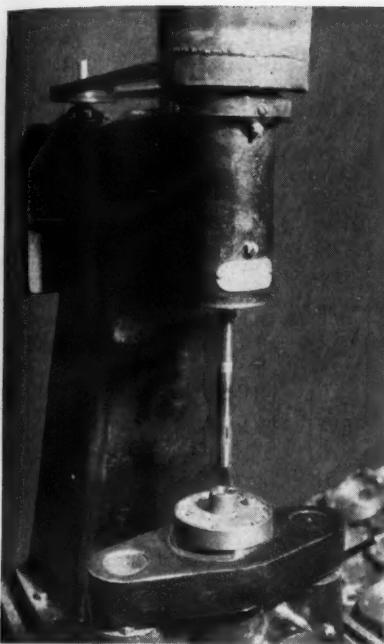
(Left) Equipment with which the shaft hole in the cylinder bearing plate is "bearingized." In this process a hard, burnished surface is produced which is held to within 0.0003 in. of the drawing dimensions.
